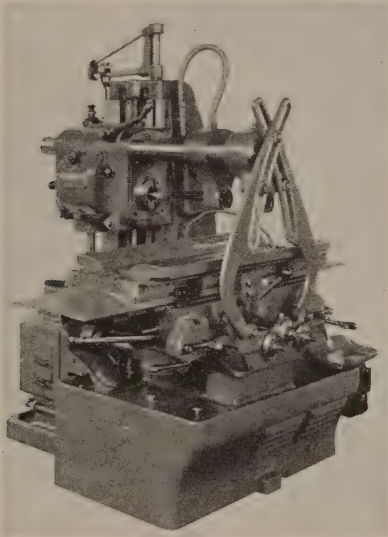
Bed-type plain milling machine. (*Courtesy of Brown & Sharpe Manufacturing Company.*)
